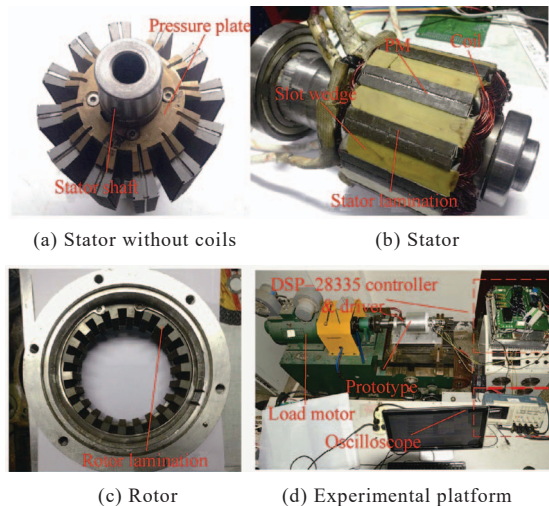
Prototyped machine and experimental platform configuration of the OR-SPM-FS machine
